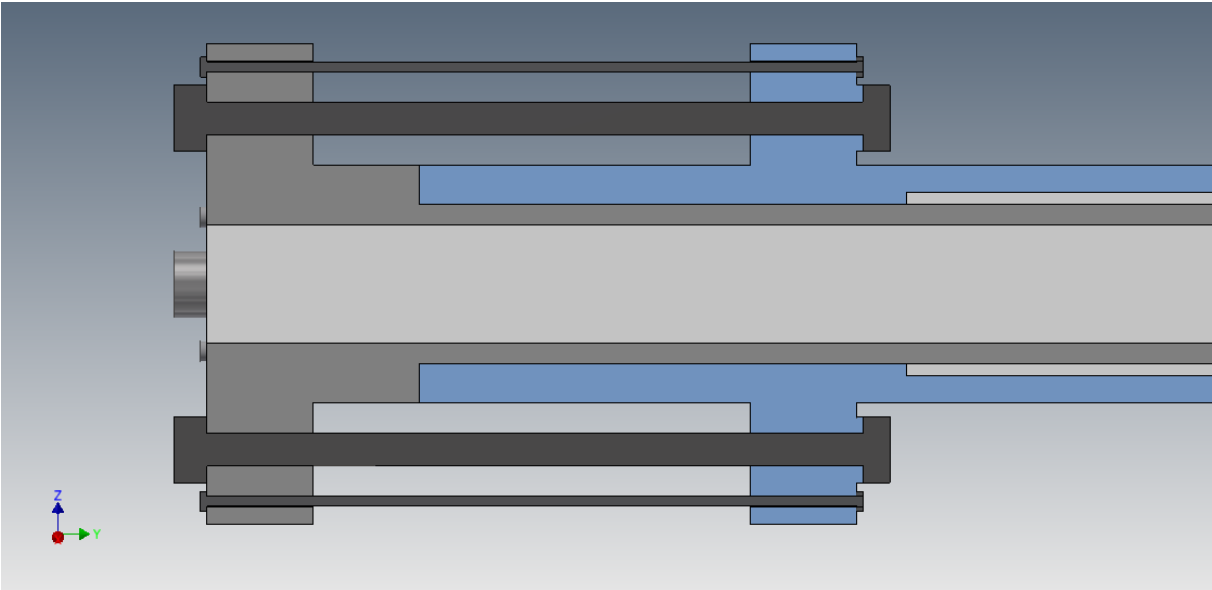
Section cut view of the interface between the upper and lower sections of the joint
